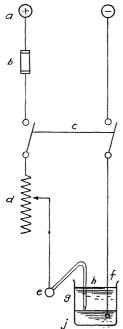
Velixon apparatus for welding fine wires.
